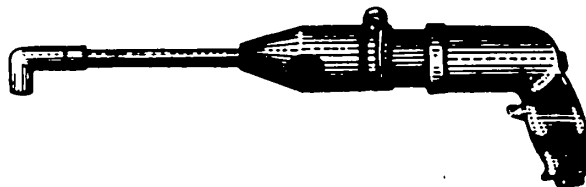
Angular Type Extension Fitting, SNU-5, Attached to Hand Drill
